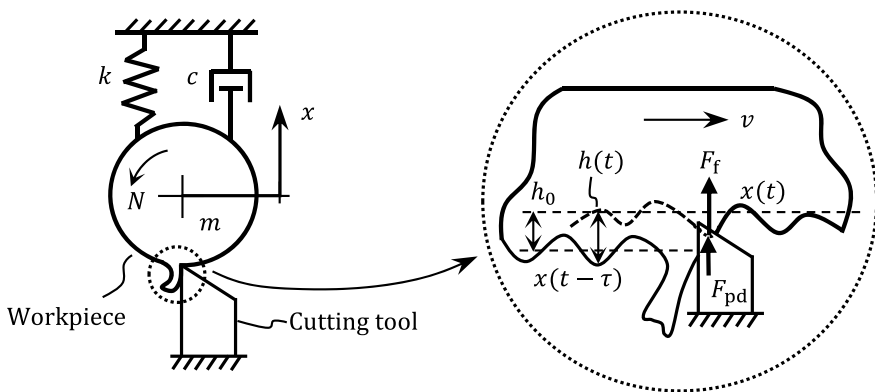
Mechanical model of turning process with process damping; the inset shows the variation in chip thickness due to regenerative effect and the interference of the tool flank and machined surface
